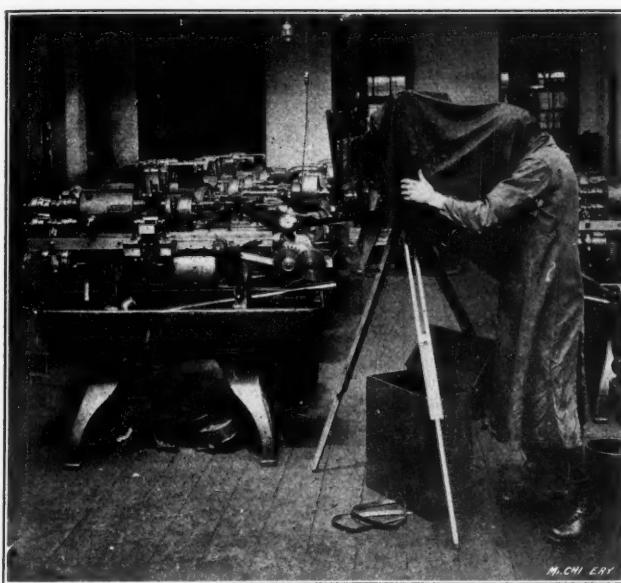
Photographing Machine in Perspective for Line Drawing Copy
